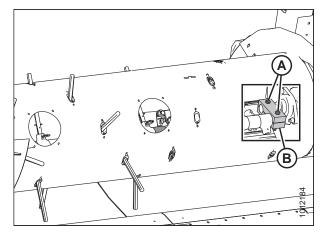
Left Side Auger Finger Support Clamp — Cutaway View Shown
